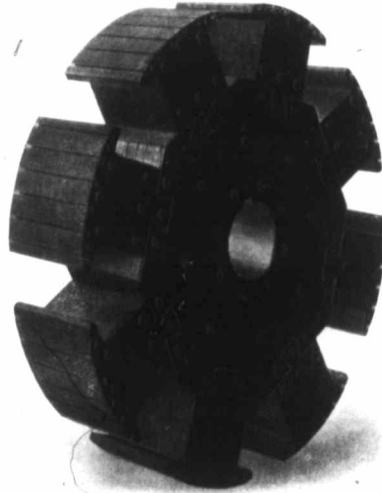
Rotor Core with Pole Pieces Assembled on Spider
